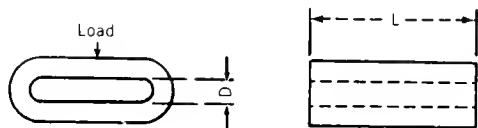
Deformed Specimen of Vacuum Brake Hose
